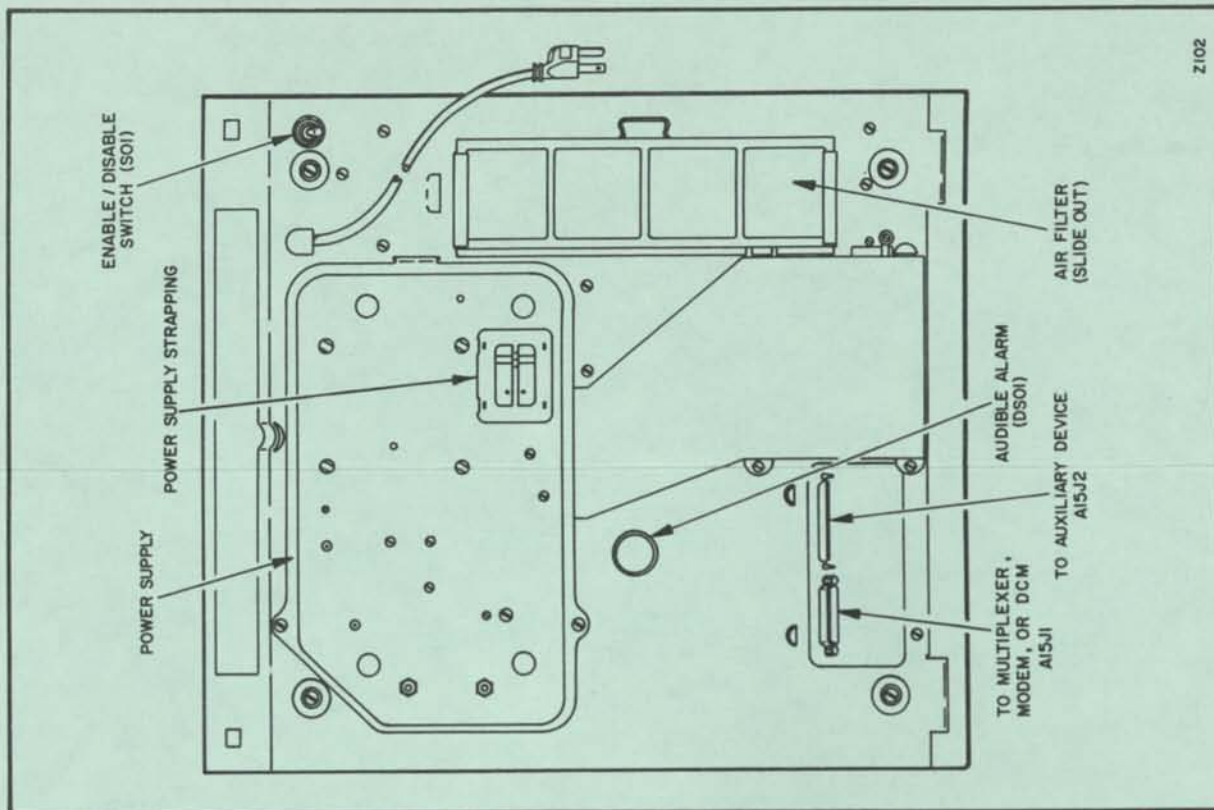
UNISCOPE 100 Display Terminal Bottom View
